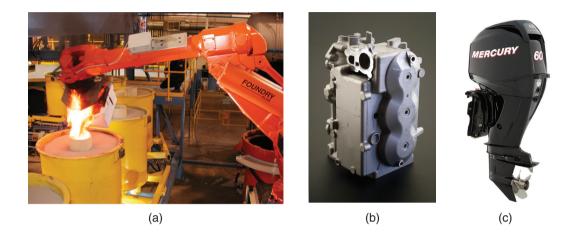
(a) Metal is poured into a mold for lost-foam casting of a 45-kW, three-cylinder marine engine; (b) finished engine block; (c) completed outboard motor. *Source:* Mercury Marine, a division of Brunswick Corporation.
